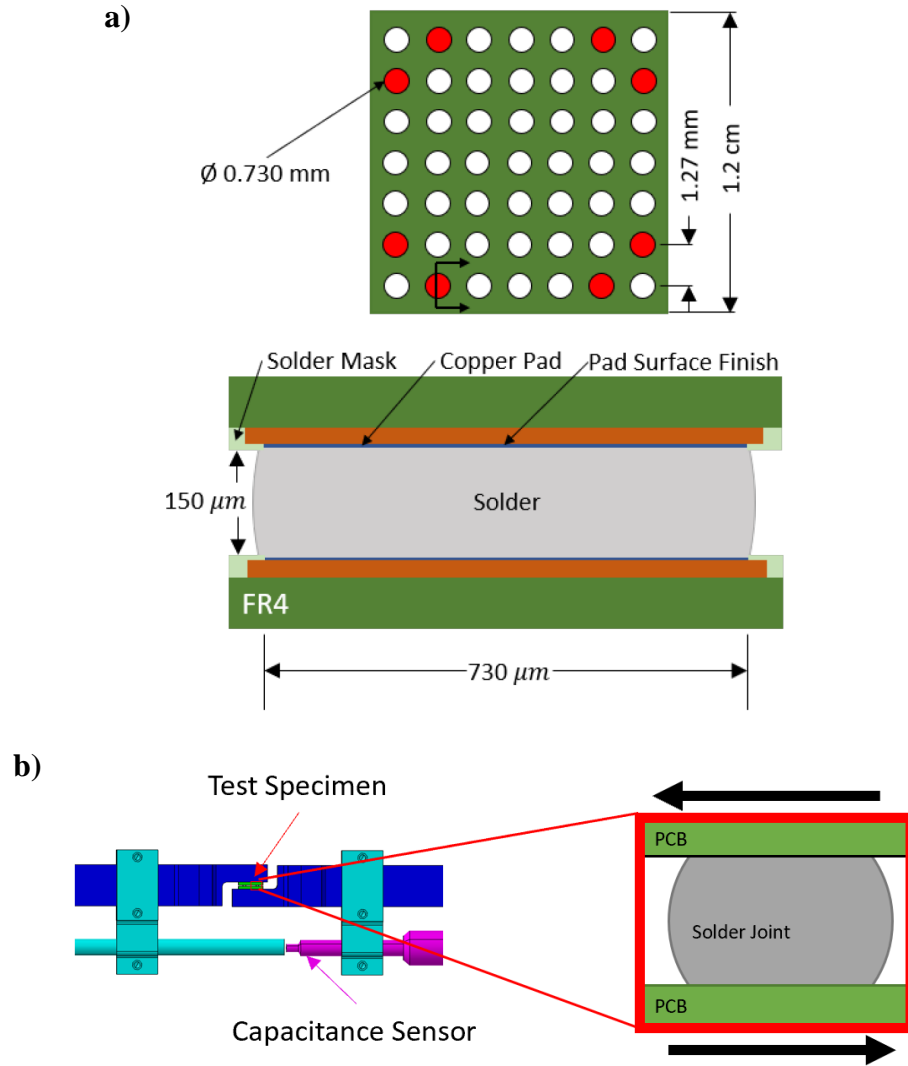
Schematic illustration of a) Sn-58Bi and Sn-57Bi-1Ag solder test specimens with 730 μm diameter pads arranged in a 7 x 7, 1.27 mm pitch grid. The eight red circles indicate the locations of the solder joints in the top view of the printed circuit board (top). Schematic cross section of an assembled single solder joint (bottom); and b) schematic illustration of the mechanical tester for shear testing
